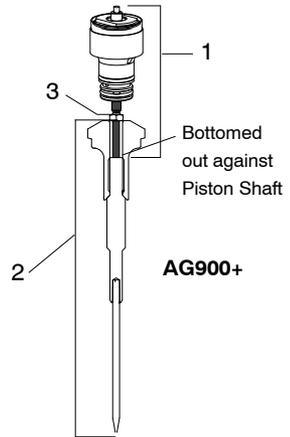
Piston/Cartridge Assembly and Needle Assembly
